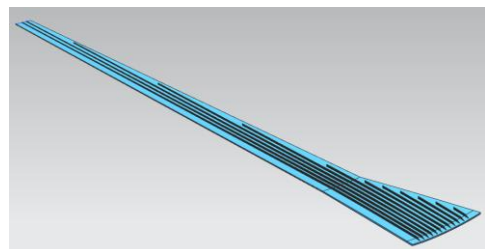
Stringers in the form of flats, attached to the lower skin surface
